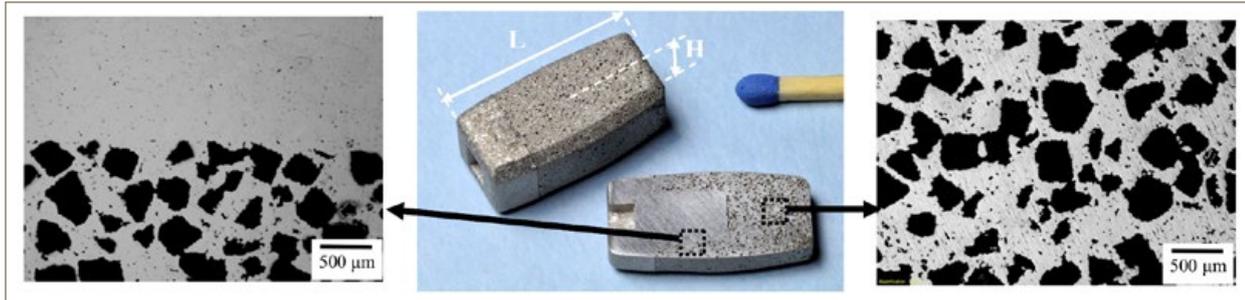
Sintered titanium spinal implant and its cross-section, produced with feedstocks with and without a space holder. Parts were produced with the automated 2-C-MIM mould and sintered at 1300°C for 3 h
